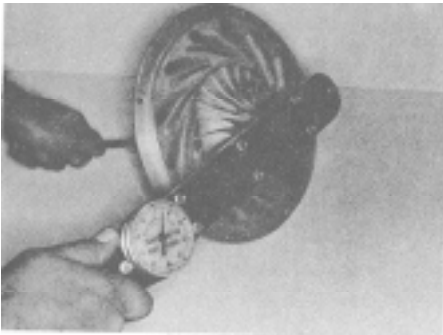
, T-437. Torquing self-locking nut on rotor shaft VT assembly
